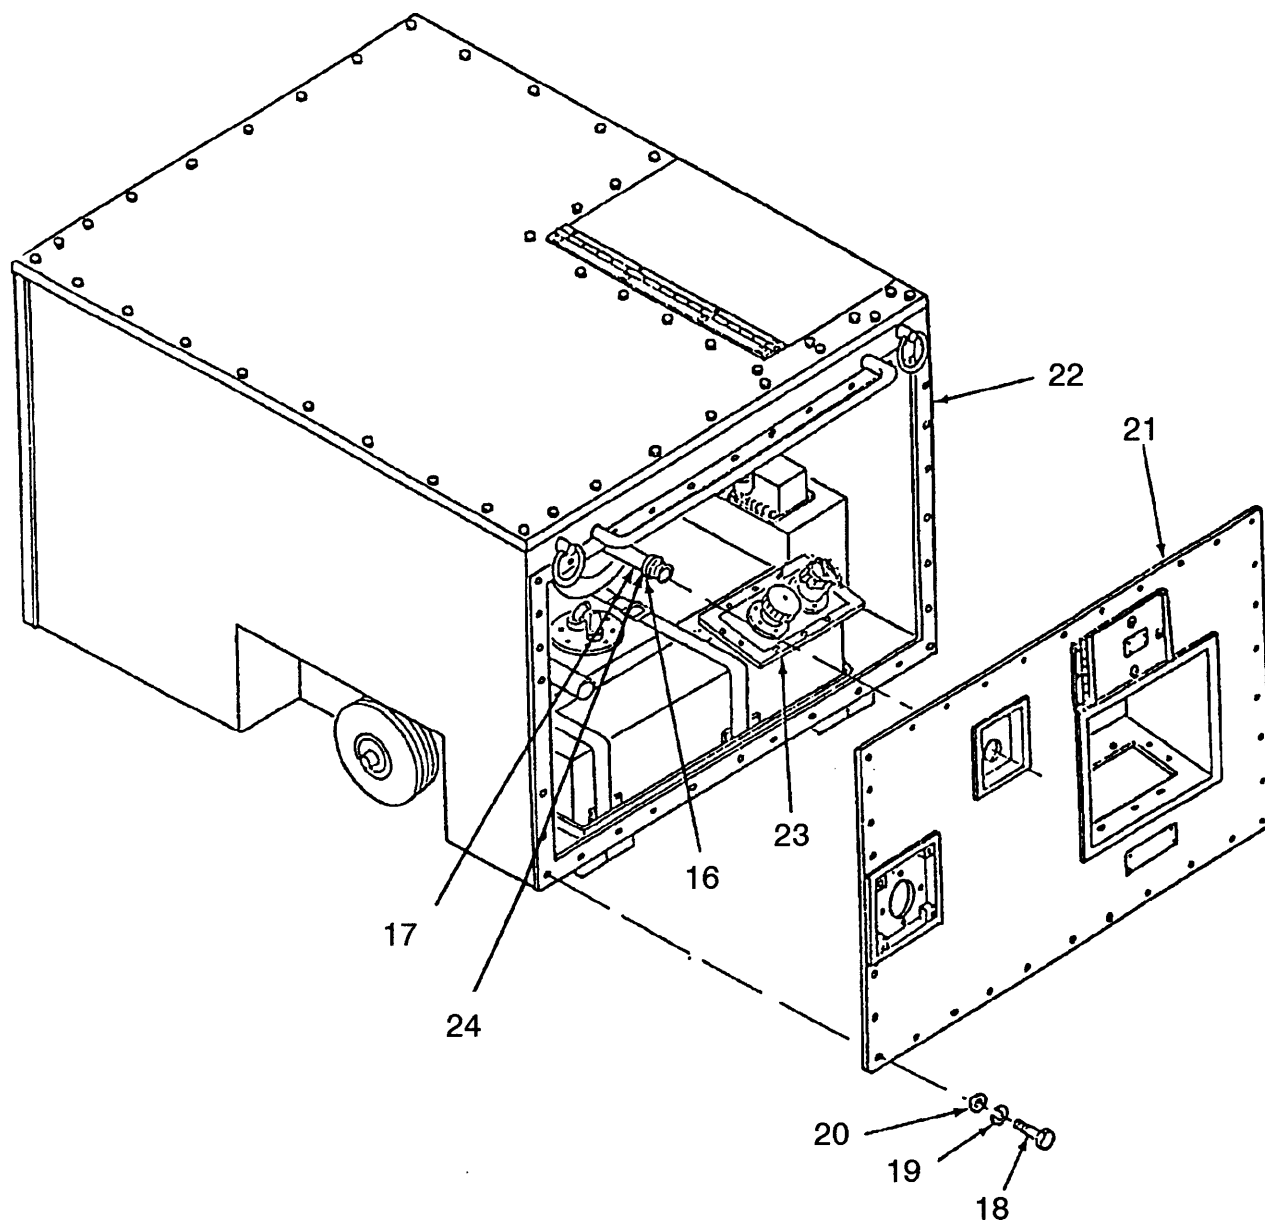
Rear Panel Assembly Removal (Sheet 2 of 2)
